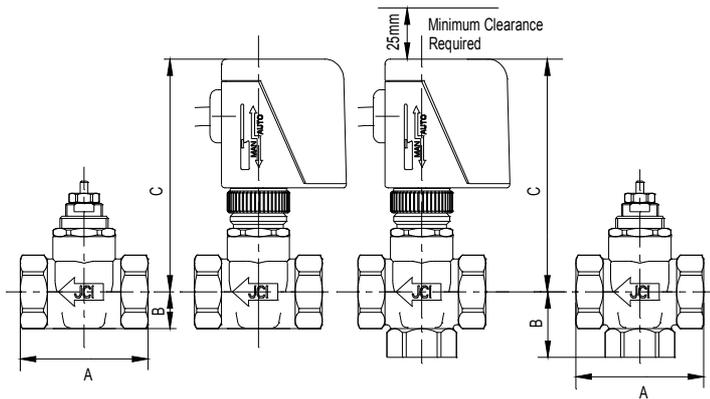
VA-7010 Actuated VG4000 Series Valve Dimensions, in. (mm) (Refer to Table 3)
